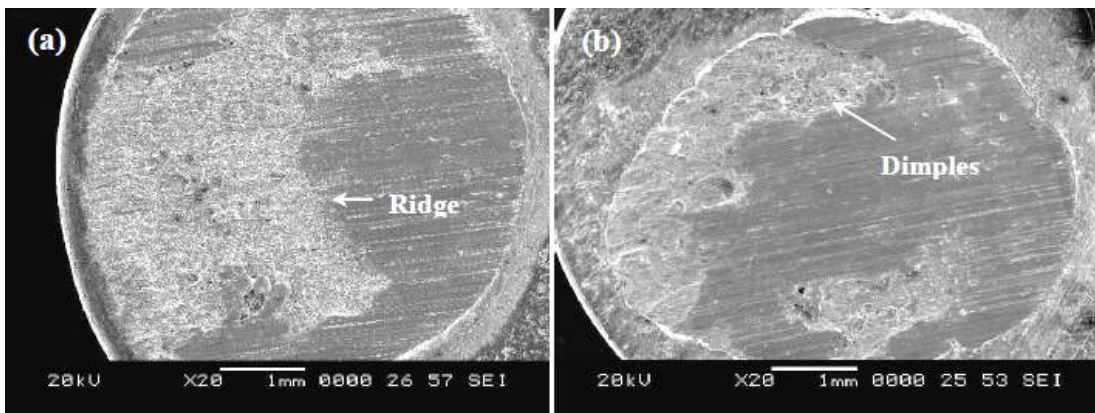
SEM micrographs of the fractured surfaces of Sn-0.3Ag-0.7Cu solder (a) smooth Fe-Ni (b) rough Fe-Ni substrate surfaces
